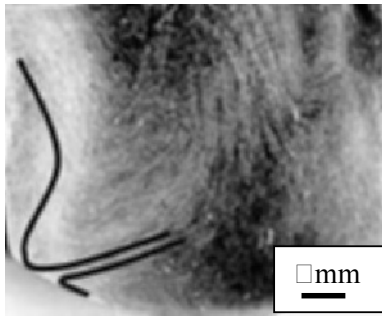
Cross-section of the specimen. Folds after 1 pass TE, route II.
